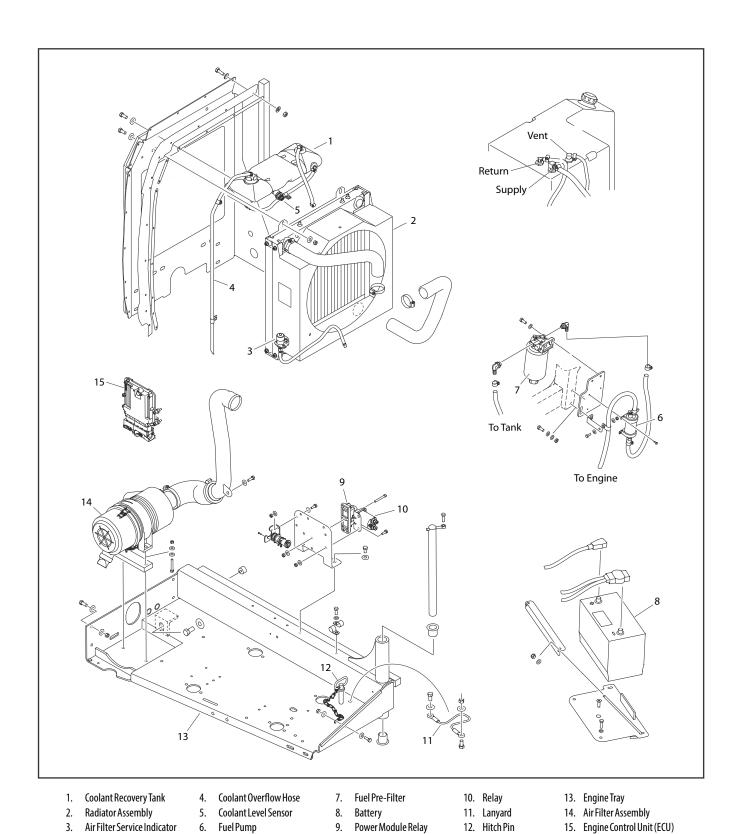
Deutz D2.9 L4 Engine Installation - Sheet 2 of 2
